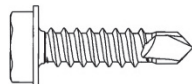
#10-16 INDENTED HEX WASHER HEAD (TYPE 2 SCREW)
